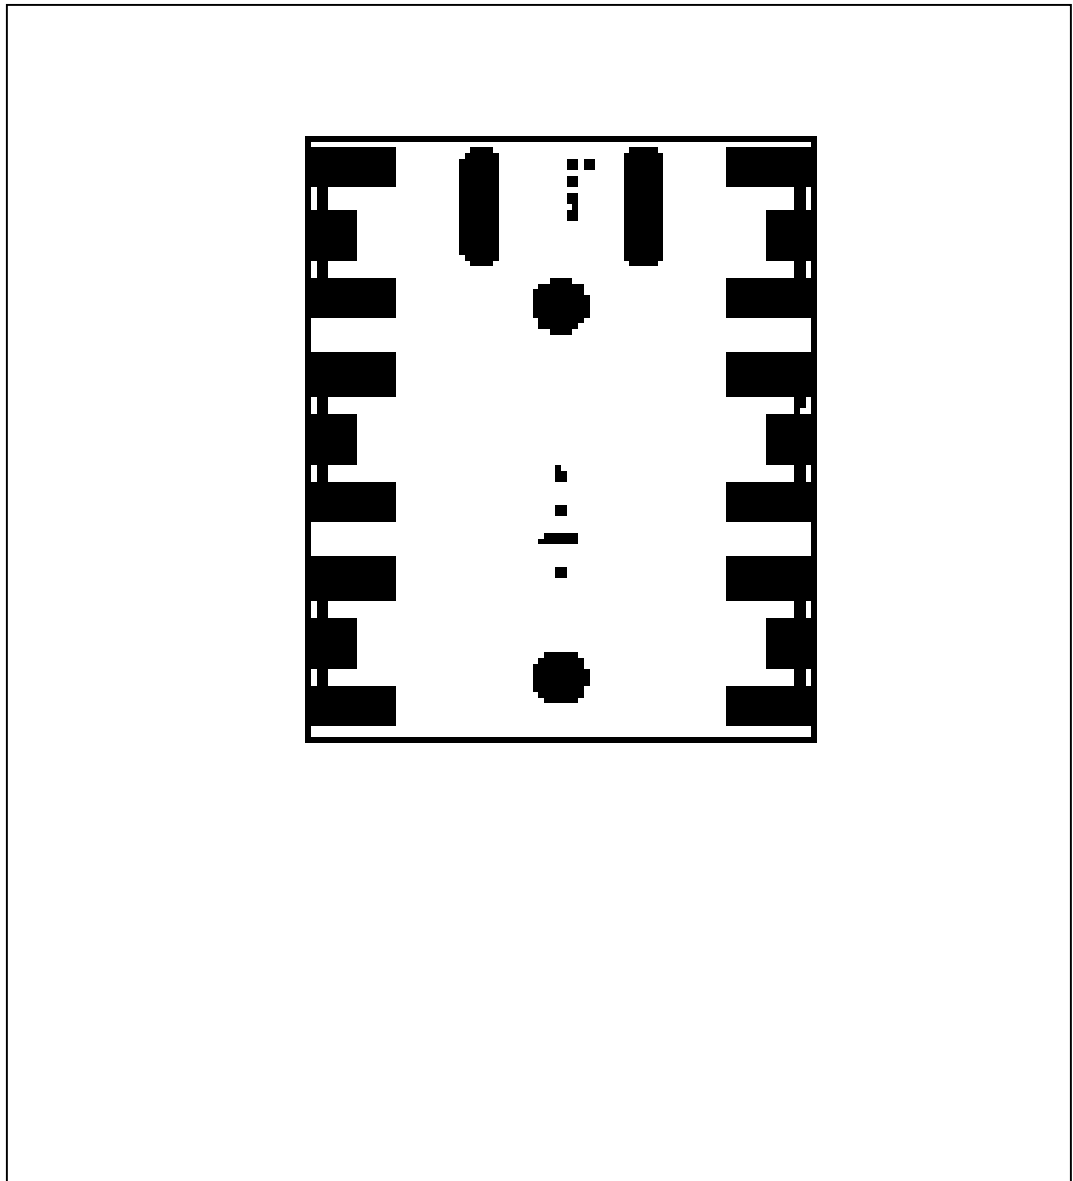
MAX3785UTTA EV Kit PC Board Layout – Bottom Side (2X), layer 4.
